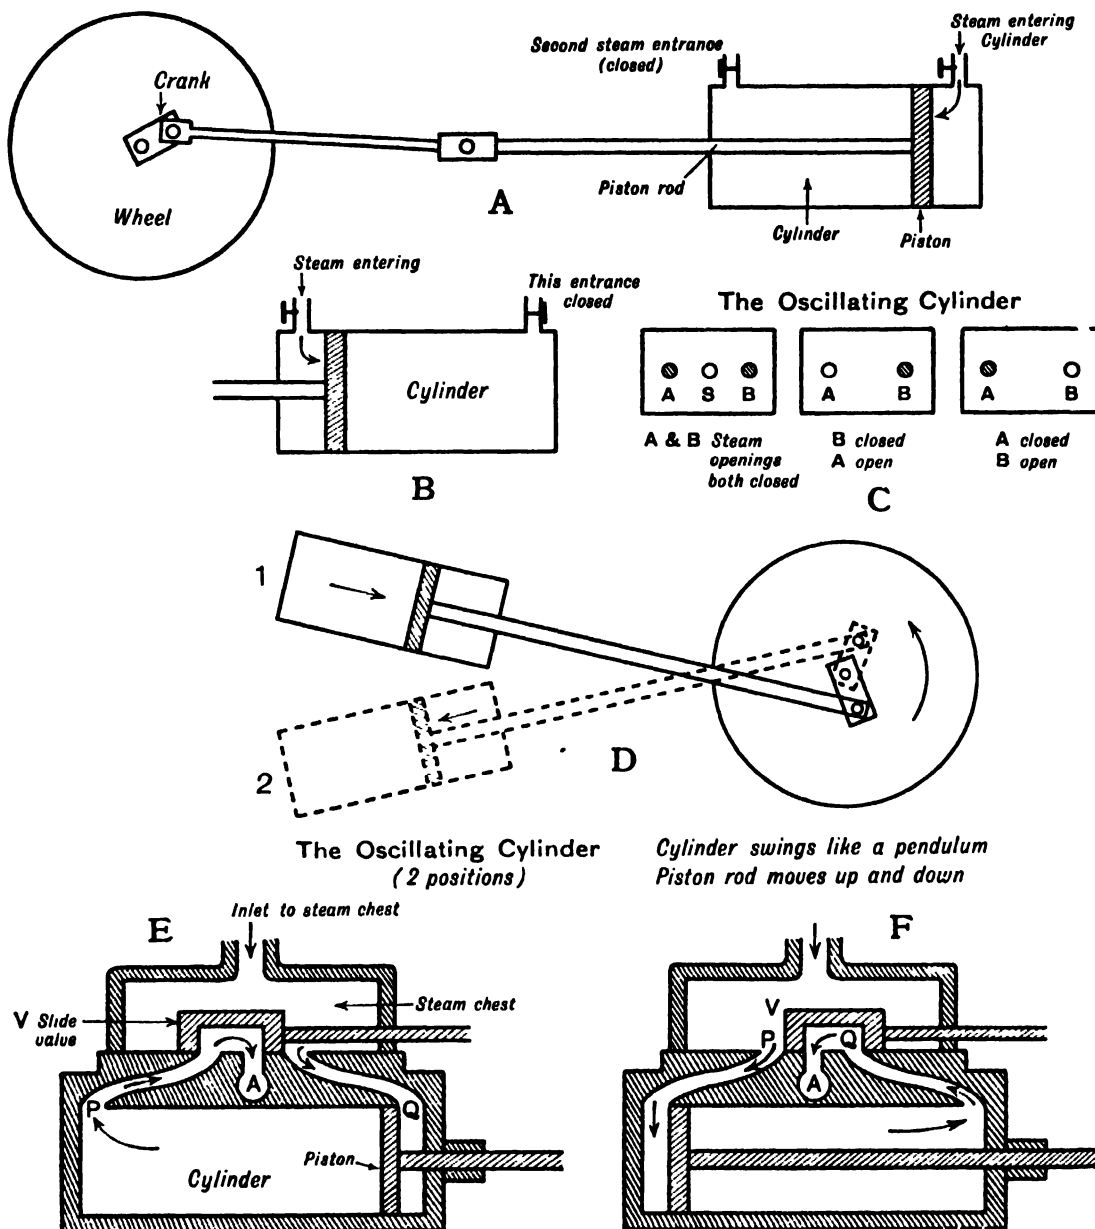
THE WORKING PARTS OF A STEAM ENGINE
